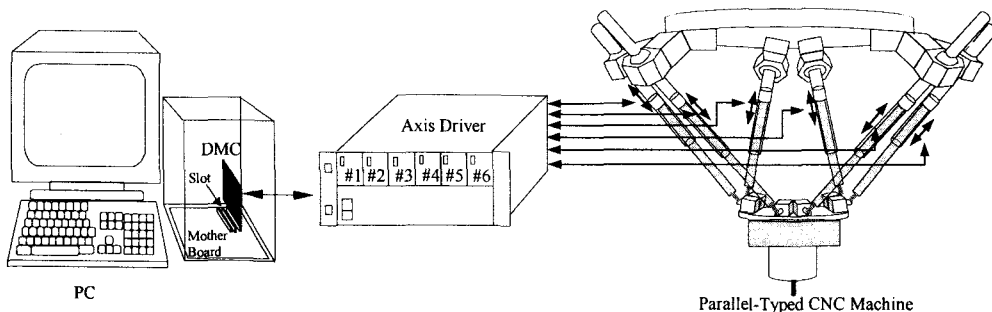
PC Based-Controller for a Parallel-Typed CNC Machine
